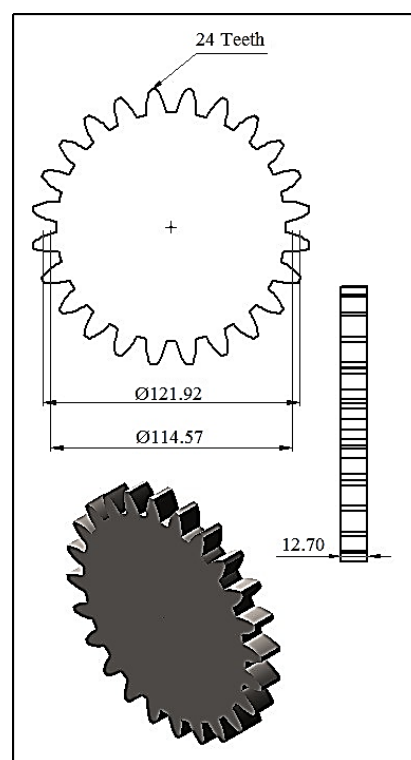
Design & dimensions of spur gear, (unit: mm).
